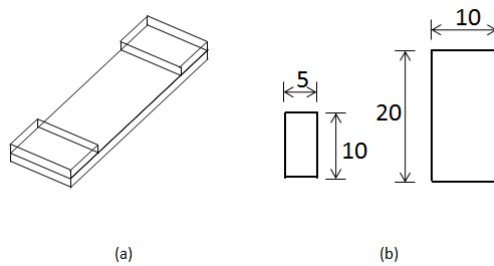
(a) shows the 'I' shaped pieces forming the 'U' shaped core. (b) shows the individual piece dimensions. All dimensions in mm
